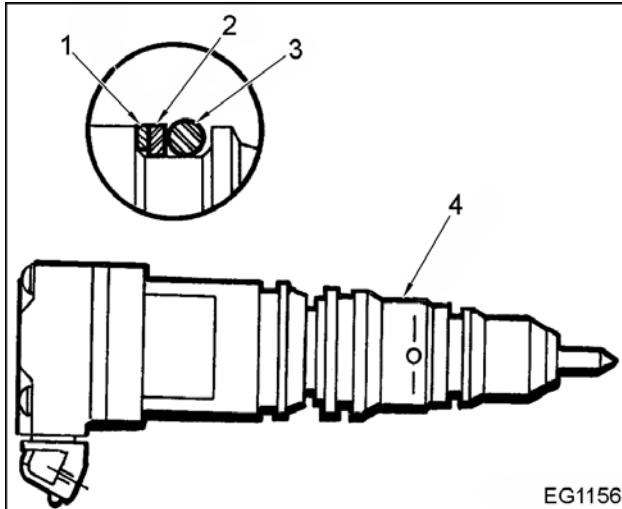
Install upper groove backup ring, cushion ring and O-ring
